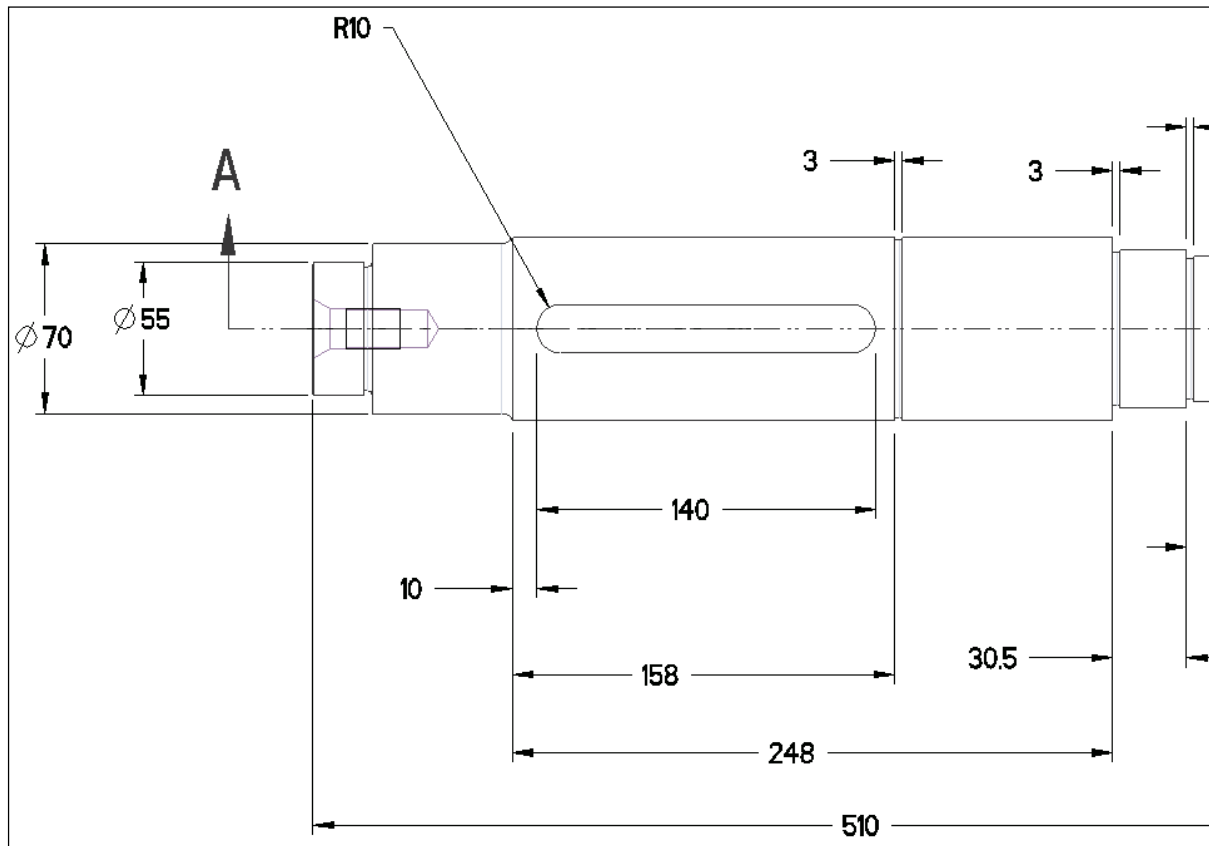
Coupling Shaft Drawing, Sheet One, Top View, Left Side
